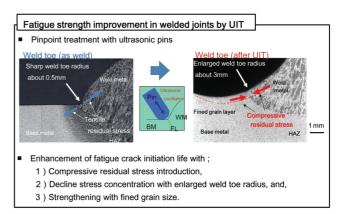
Enhancement mechanisms of fatigue crack initiation life by UIT
